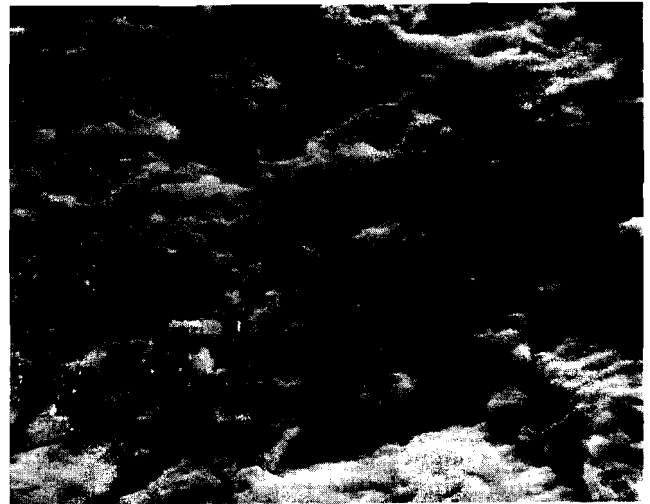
Striation analysis on the fracture surface from Fig. 7 4000X
